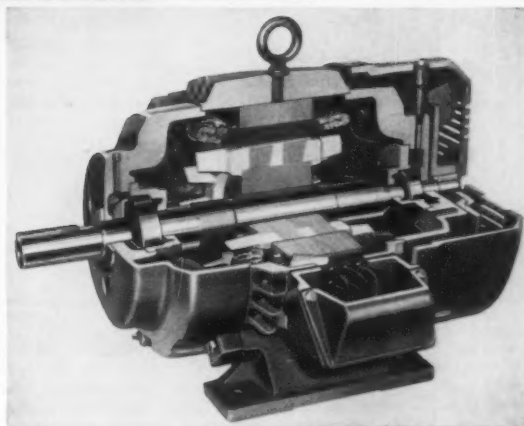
Squirrel-cage ac motor, totally enclosed and fan cooled by blower mounted on end of shaft. Dirt, moisture, and corrosive elements are kept out of motor internals. Motor frame is constructed of cast-iron and is corrosionproof
